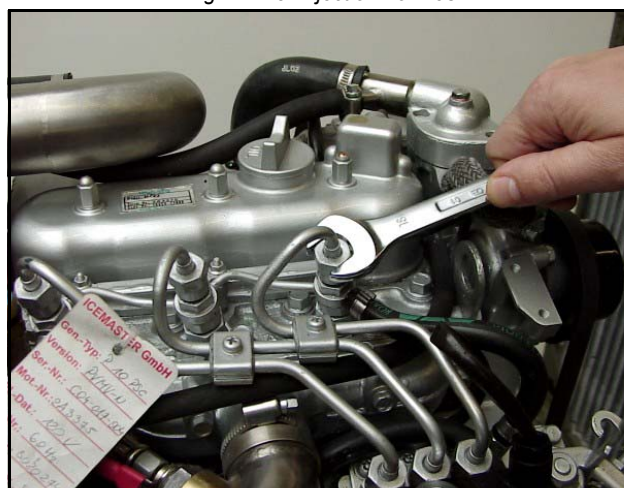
Ventilation screw at the fuel solenoid valve
